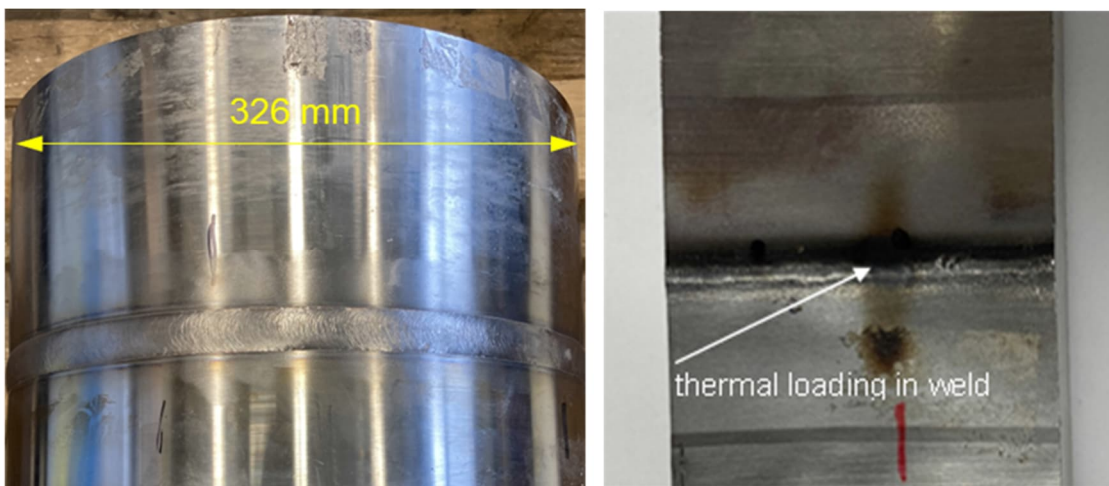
316L pipe welded with NG-GTAW method (left) and location of thermal cycling on the inner surface of the pipe (right).
